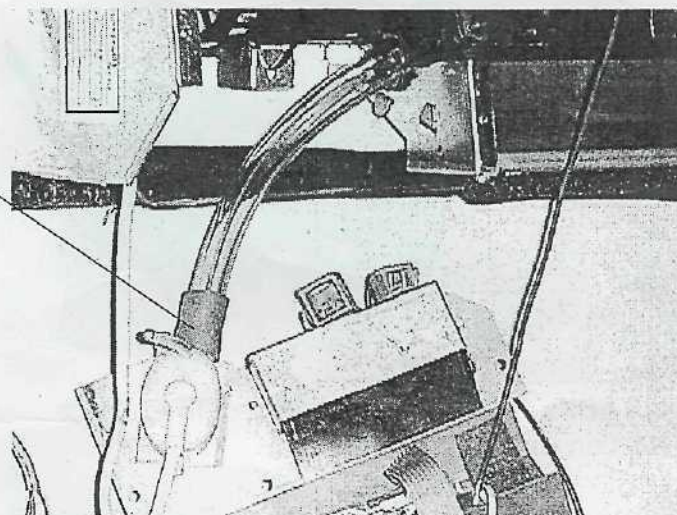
Sump/Detection Unit Installed On Control Panel.
